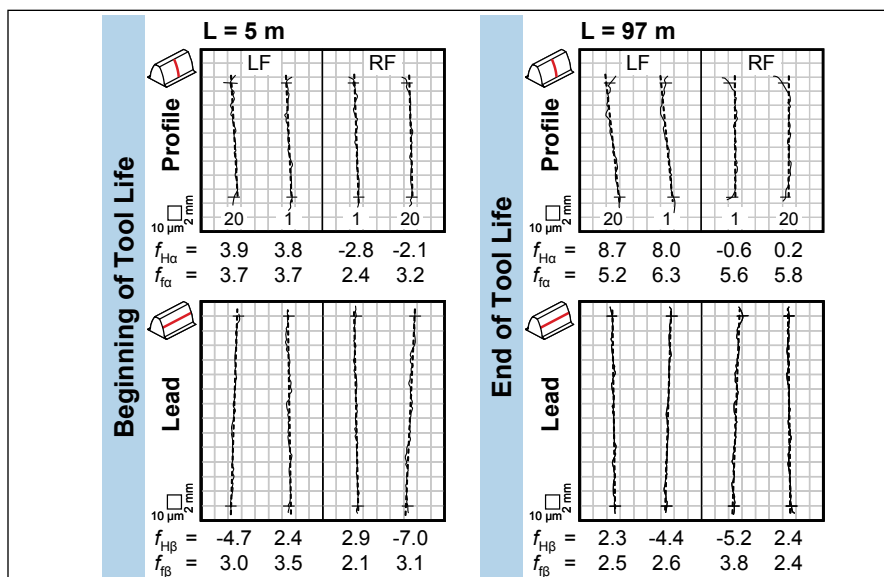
Gear finish hobbing without tooth root machining: workpiece accuracy.
